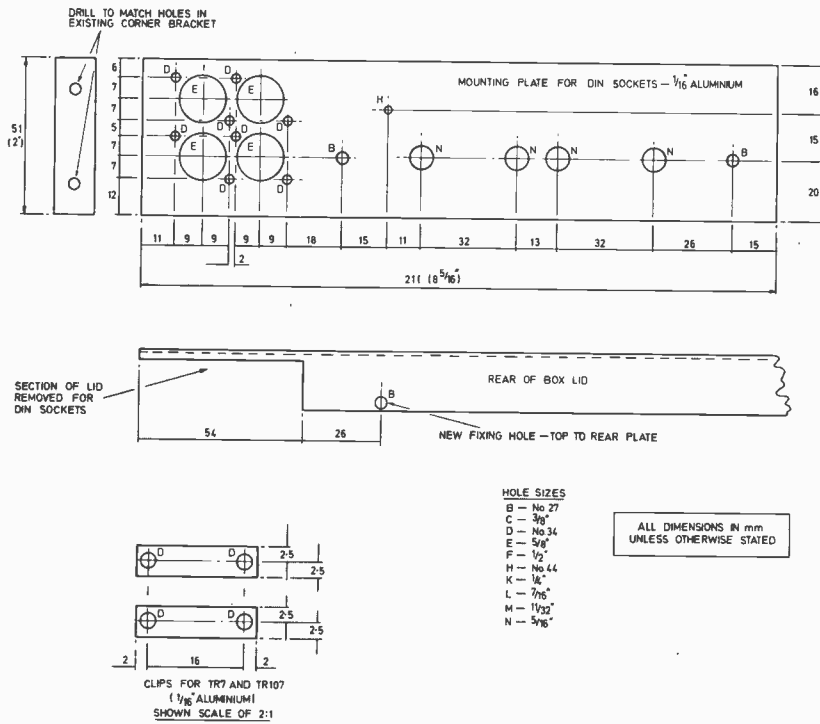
Drilling details for DIN socket mounting plate, lid and small heat-sinks for TR7 and TR107
